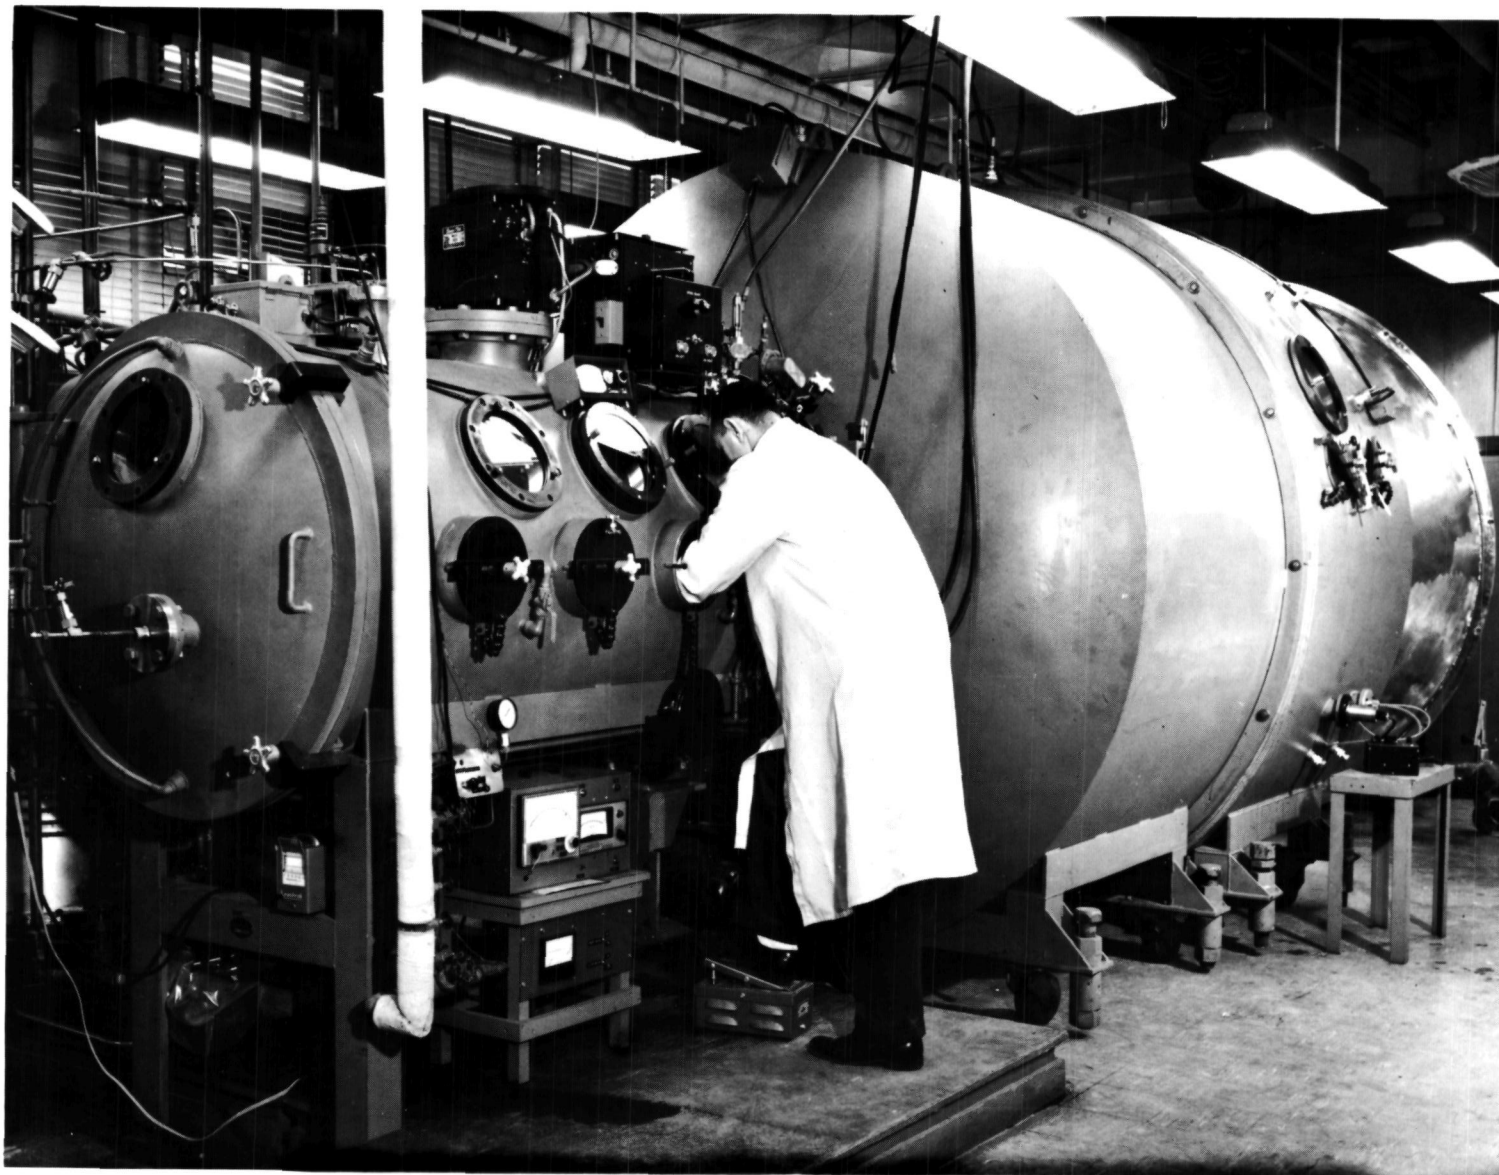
Weld Chamber. (P69-2-3E)
